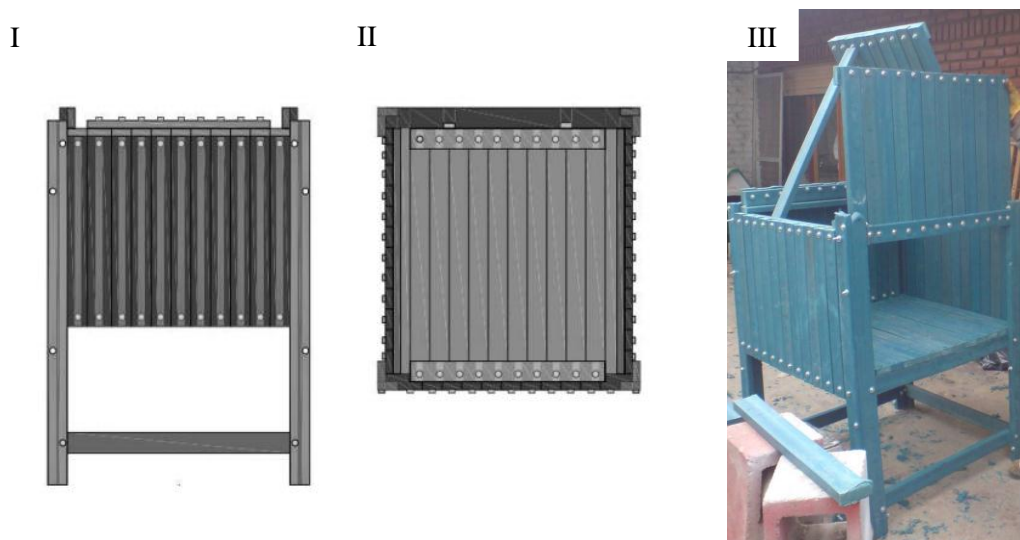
Extended Volume Composter (EVC). Computer Aided design: front view (I) and upper view (II). Figure III shows final prototype with side door and the top lid opened
